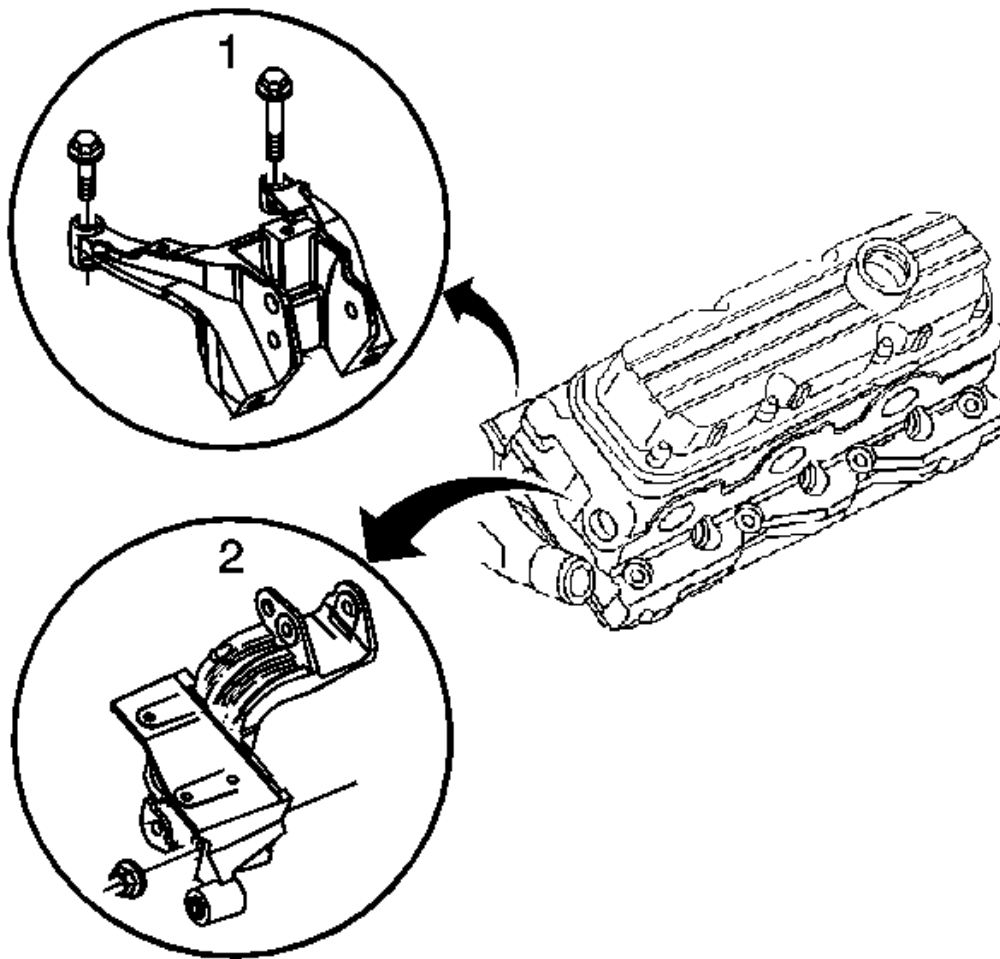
View of Engine Mount Strut Upper Bracket Bolts
